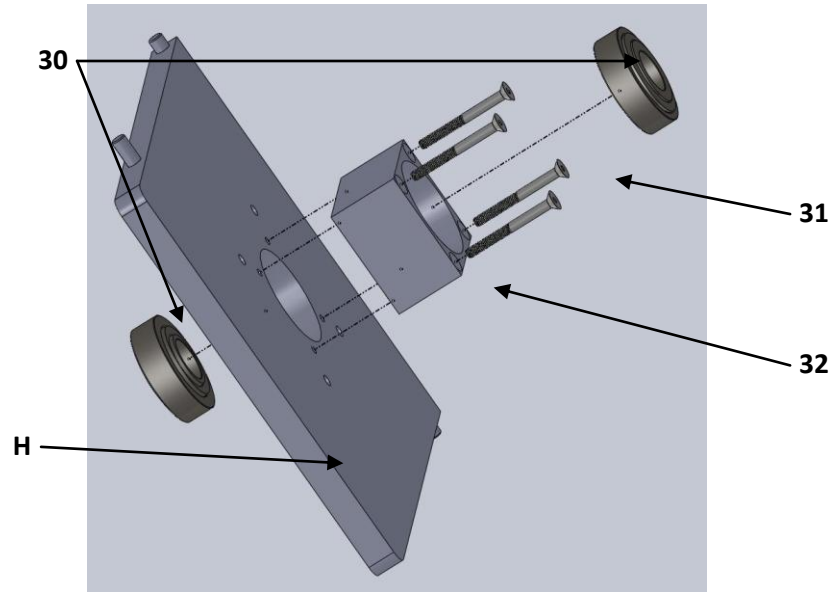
Table Assembly (I) – (H, 30, 31, 32)
